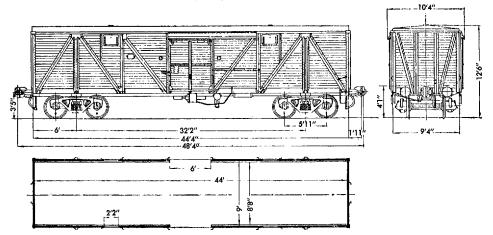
Sketch of a four-axle boxcar of welded construction with a capacity of 60 metric tons
